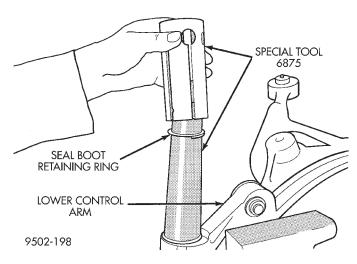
Retaining Ring And Expandable Collar Installed On Tool
